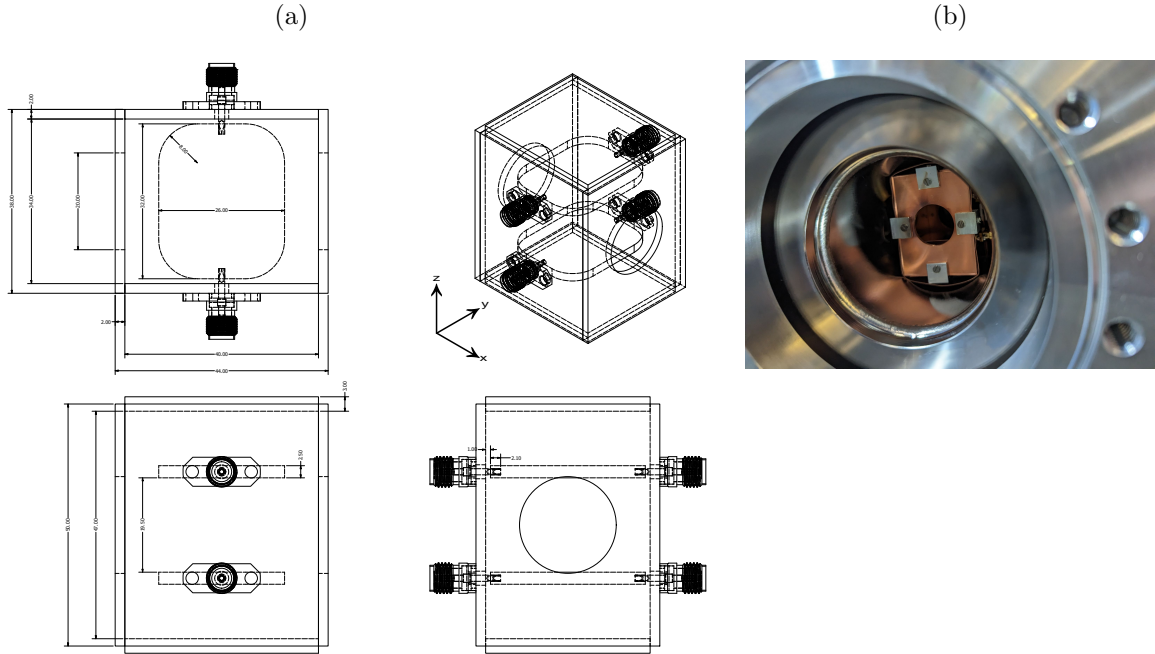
(a) 2D drawing and (b) photograph of the 20 mm MW apparatus previously installed in the GBAR beam line.
